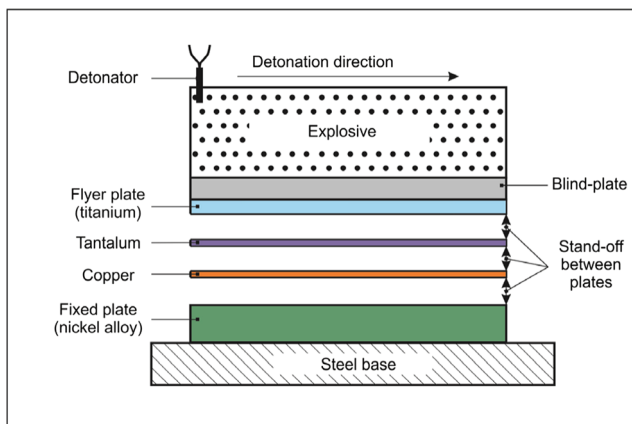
The scheme of explosive welding of Ti/Ta/Cu/Ni alloy laminate composites
